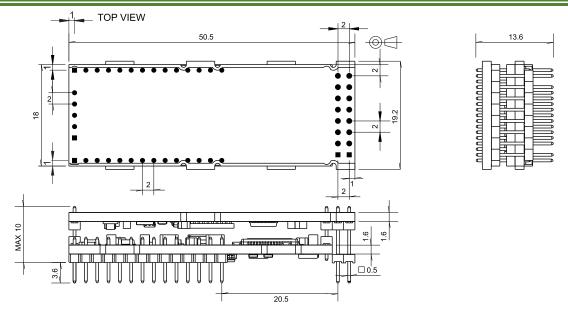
iPOS2401 MX-CAT drive dimensions
